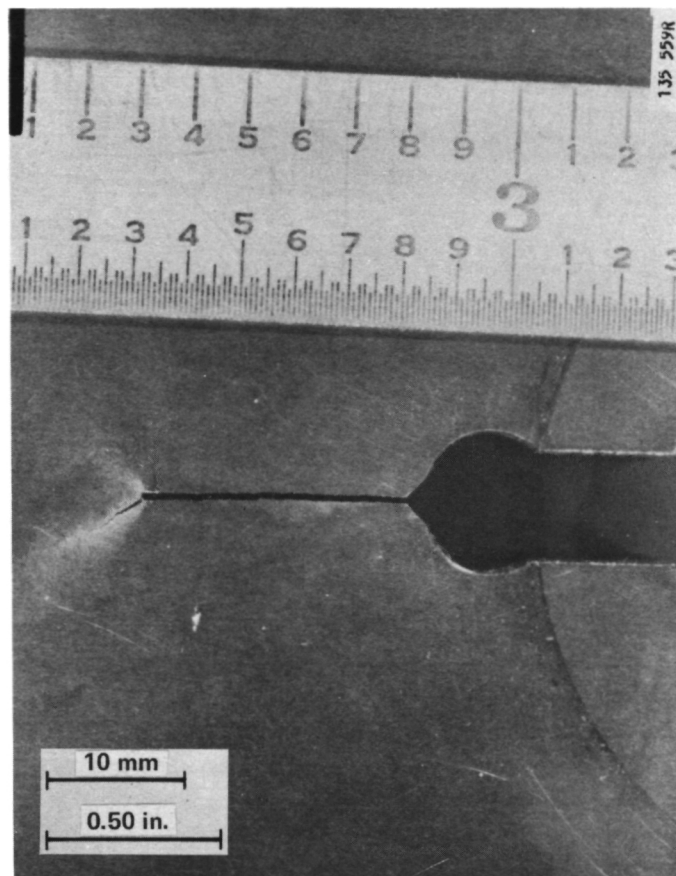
Crack Tip on Top Surface of Disk 21 After Test
